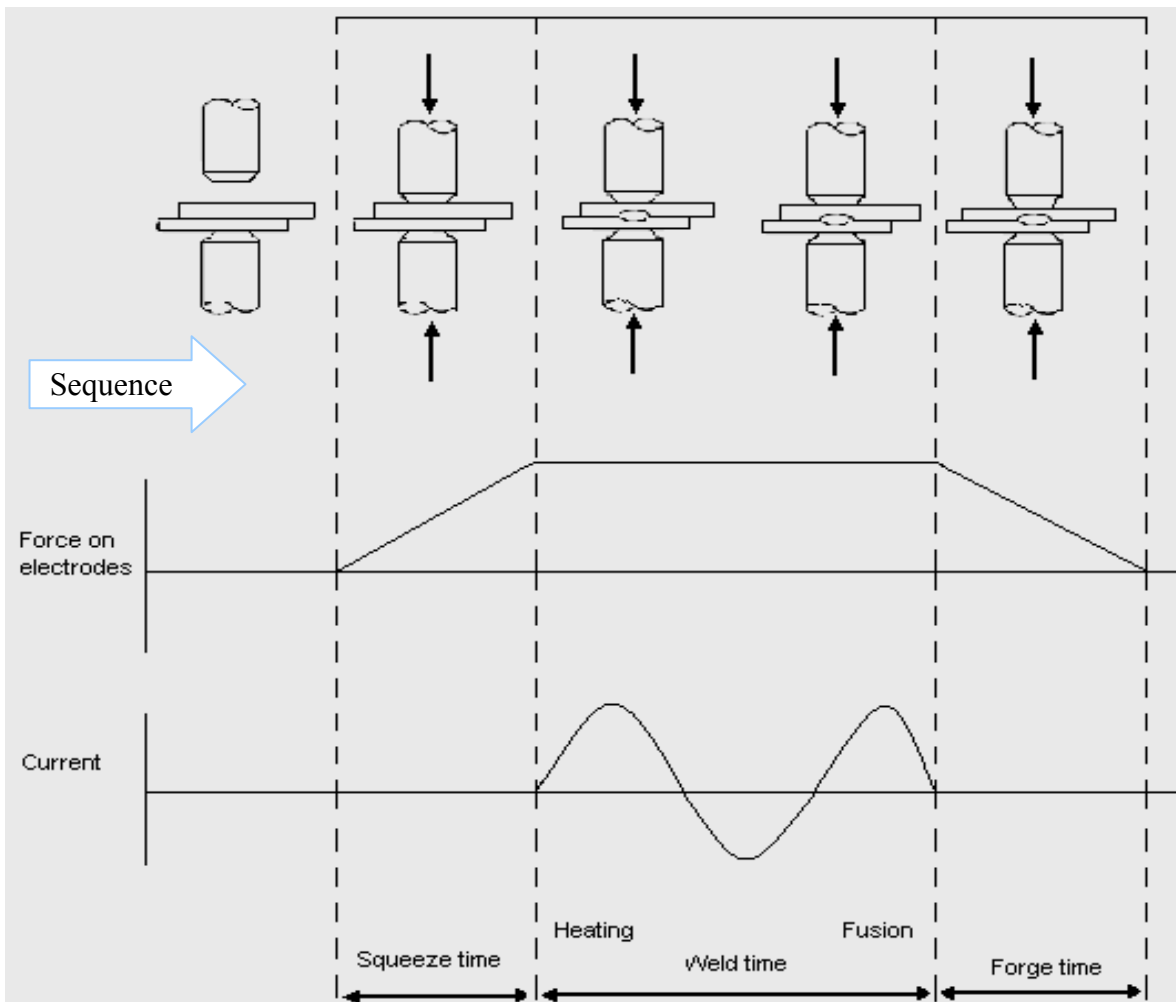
Resistance spot welding cycle ⁽¹⁷⁾
